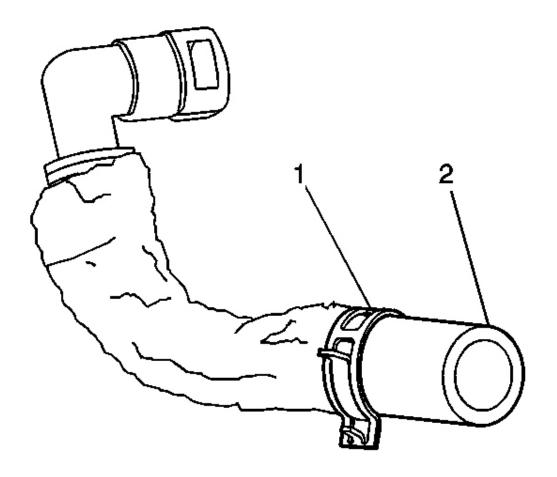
Removing/Installing Heater Inlet Hose - (Short Wheel Base)
